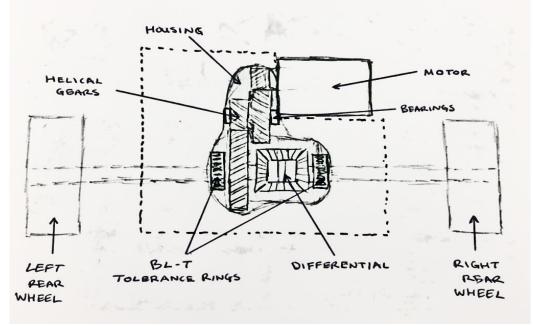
Boundary sketch showing the scope of our design which includes bearings, shafts, gears, differential, tolerance rings, and the housing.
